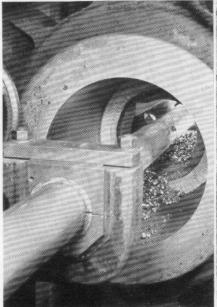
Opening out a bored boss 8½ in. dia. to 8½ in. square × 3 ft. on a planing machine. The part being machined is a cast steel main spur wheel for a Rapier W150 Walking Dragline.
